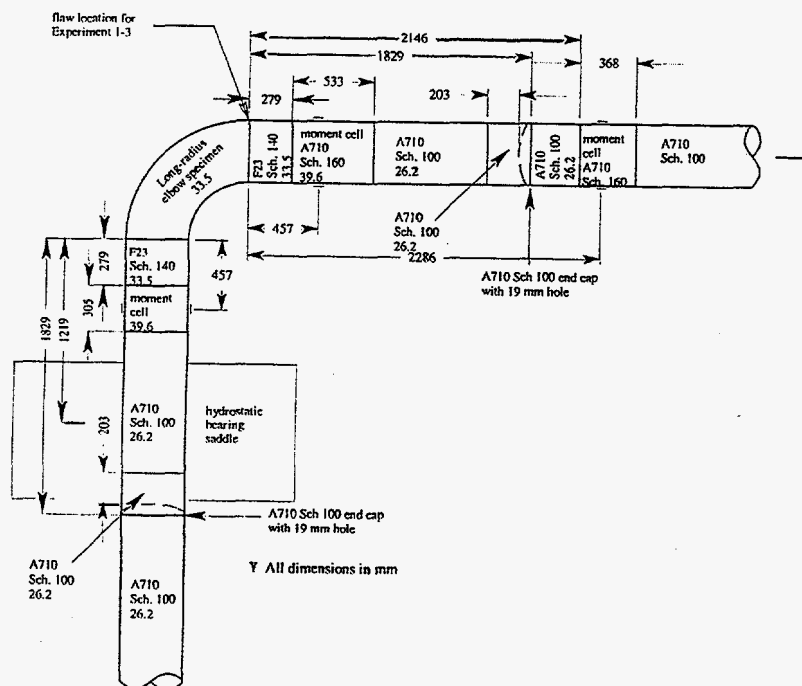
Schematic of pipe loop in vicinity of Elbow 4 for elbow girth weld pipe system experiment (Experiment 1-3) showing the end caps used to minimize the energy in the test specimen in the case of a DEGB
